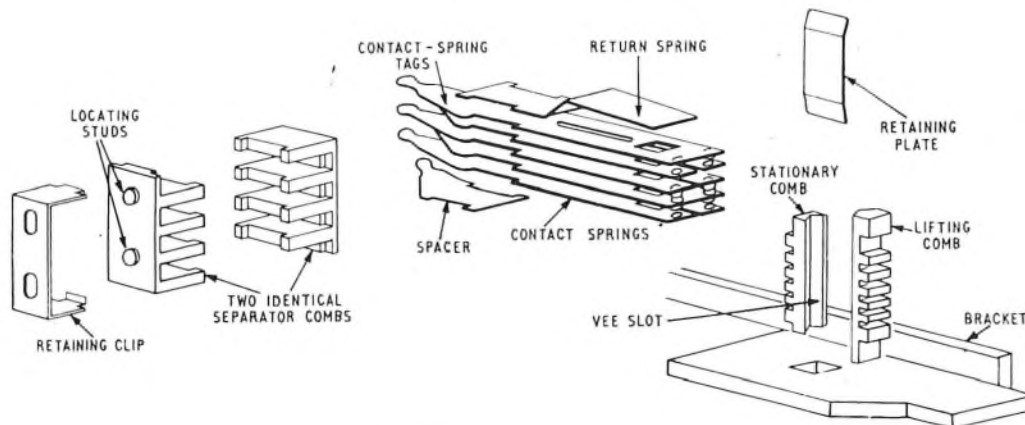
DETAILS OF SPRING-SET ASSEMBLY
